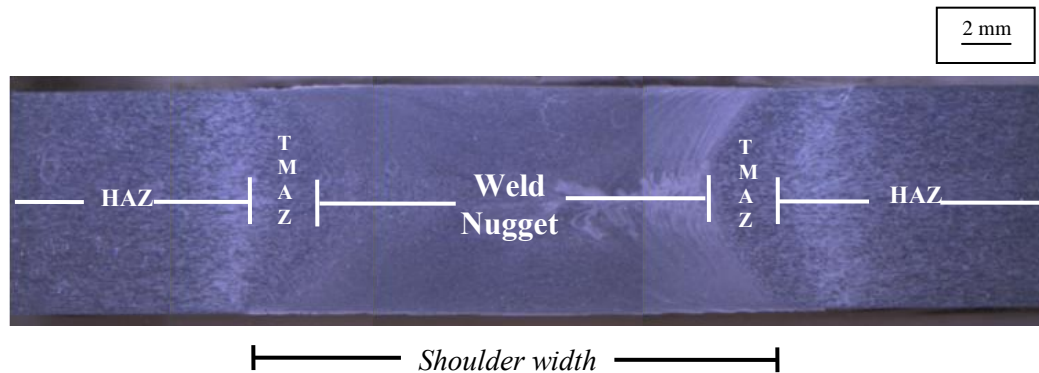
Friction stir weld microstructural zones. Four main regions have been identified in a friction stir weld, the base metal, (BM) the heat affected zone (HAZ), the thermo-mechanically affected zone (TMAZ) and the weld nugget. The base metal is not shown in the macrograph. The advancing side is presented on the right side of the macrograph.
